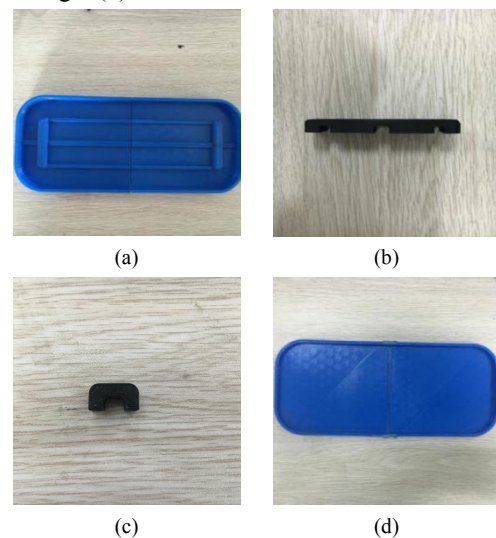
Schematic diagram of the moulds: (a) base mould, (b) chamber moulds, (c) segmentation blocks, (d) cover mould.
